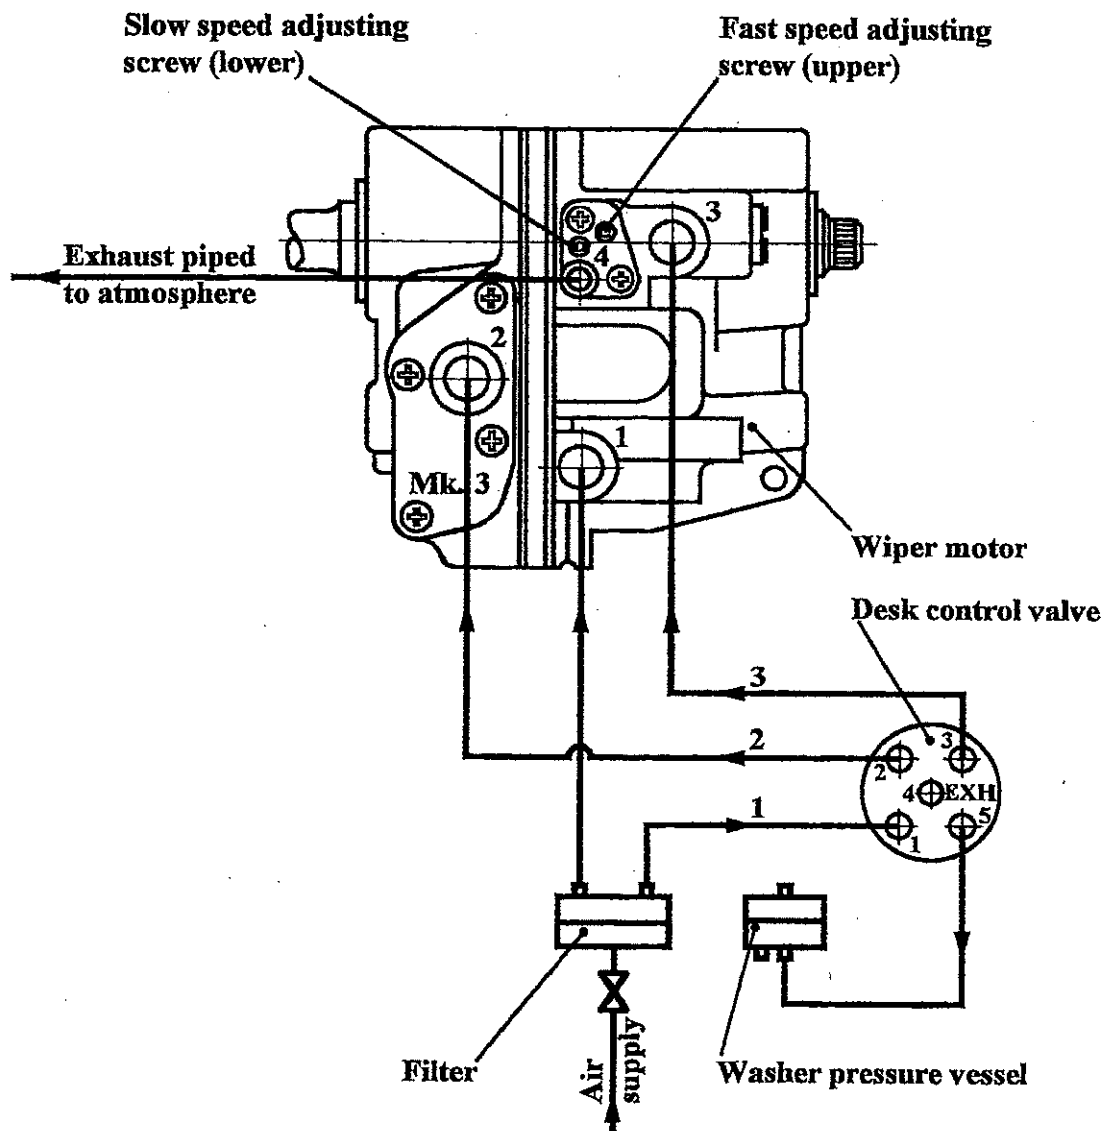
Wiper Motor Adjustment And Details Of Air Connections
